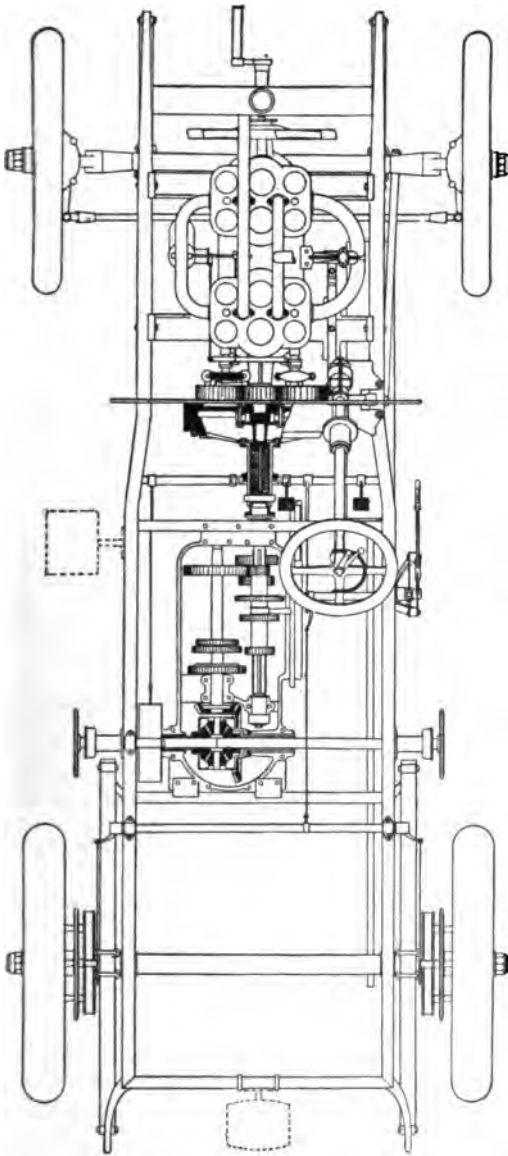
Chassis of the Smith-Mabley Simplex Touring Car, an American-built gasoline vehicle, built after Panhard models. This car is typical of many of the best points of French designs. The motor has four cylinders, all valves being positively operated. The improved Panhard transmission gear is used, its connection to a single bevel on the differential drum being shown. The main brake drum is set on a sleeve to which the differential is also attached.
